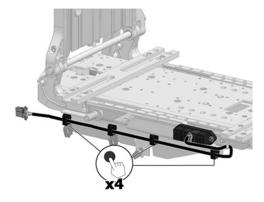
Tilt motor cable mounted with four cable brackets (seat depth $22^{\prime\prime}$ - $23^{\prime\prime}$).
